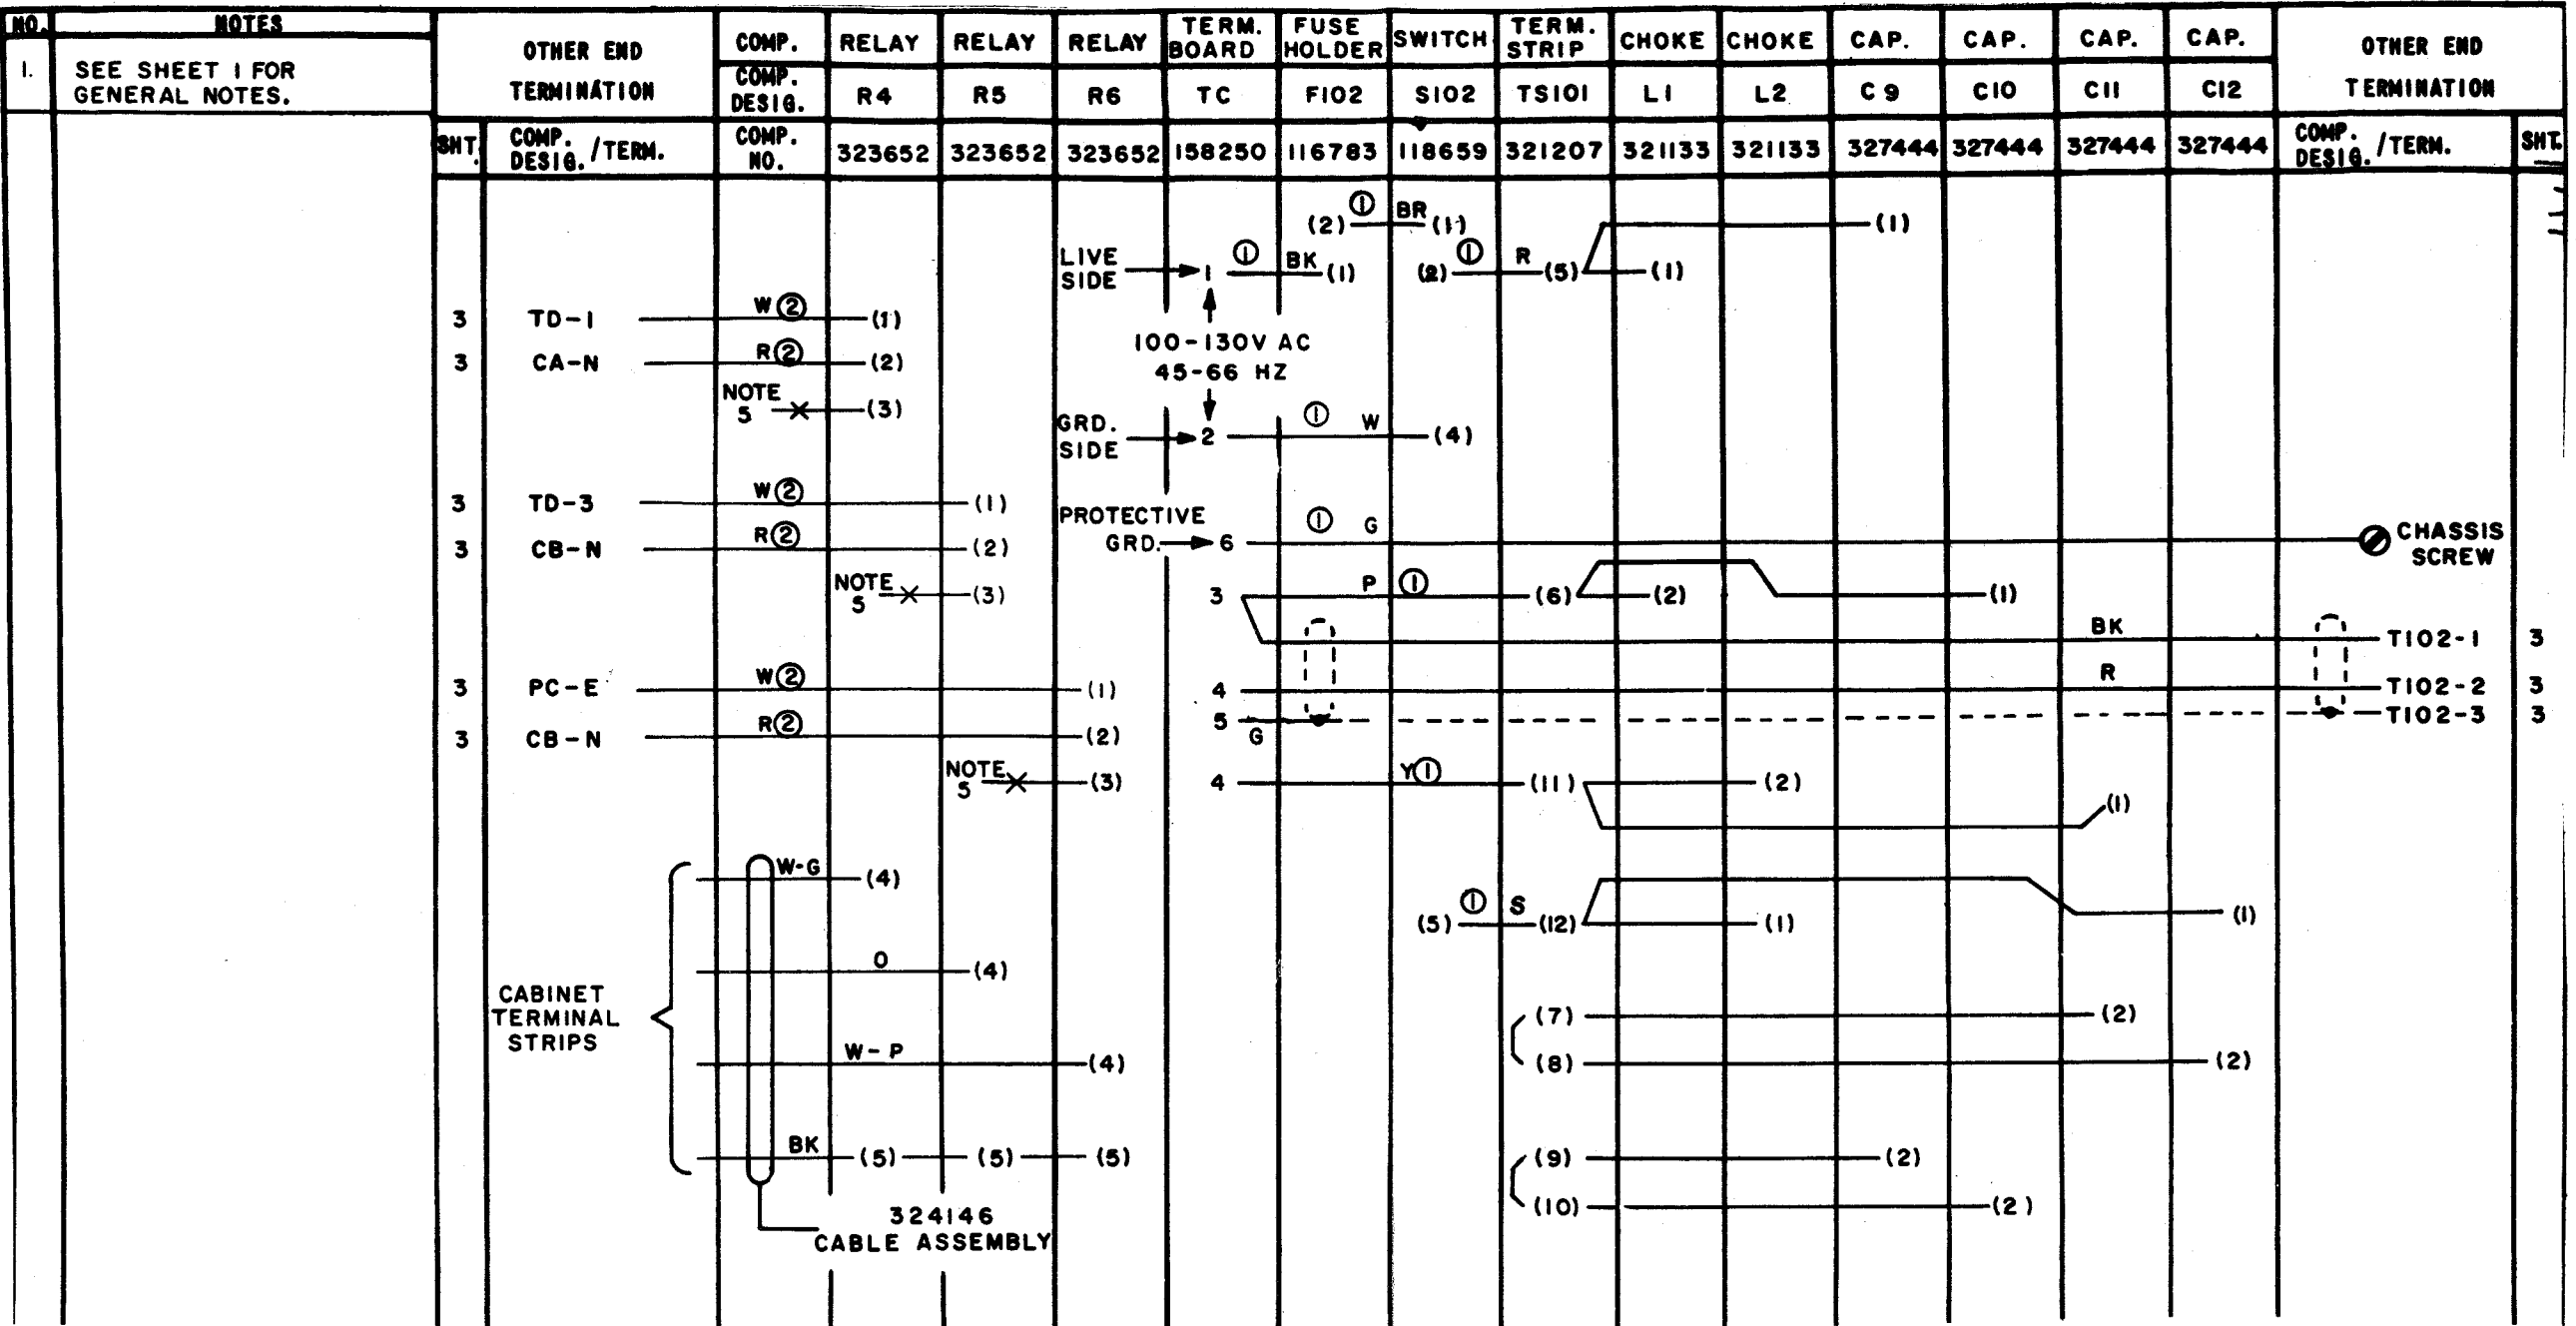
323812 Electrical Service Assembly (Clutch) Wiring Diagram (Sheet 4 of 4)
